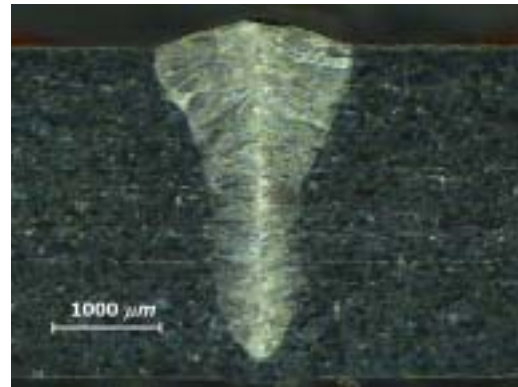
Cross-sectional area of bead on plate welding at P=1.4kW, v=1.0m/min and z=0.5mm
